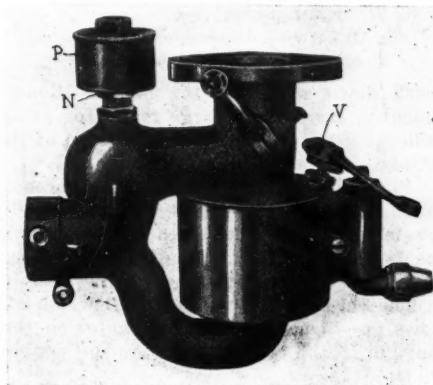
Mayer carburetor, showing adjusting points for gasoline and air
